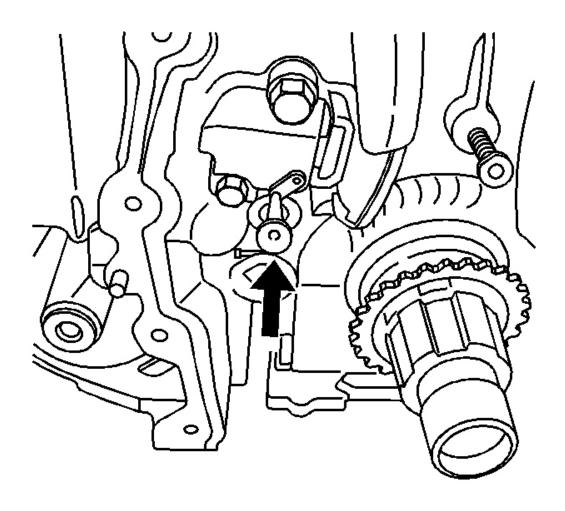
View Of Tee At Timing Chain Tensioner Courtesy of GENERAL MOTORS CORP.
